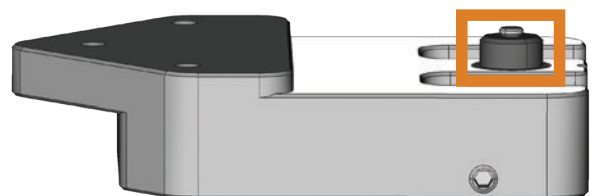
MEASURING KEY BETWEEN THE TOOL MAGAZINES (MARKED ORANGE)
